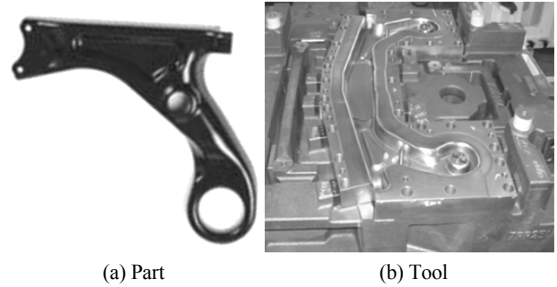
One-piece lower-arm part manufactured in HPF process and its prototype tool
